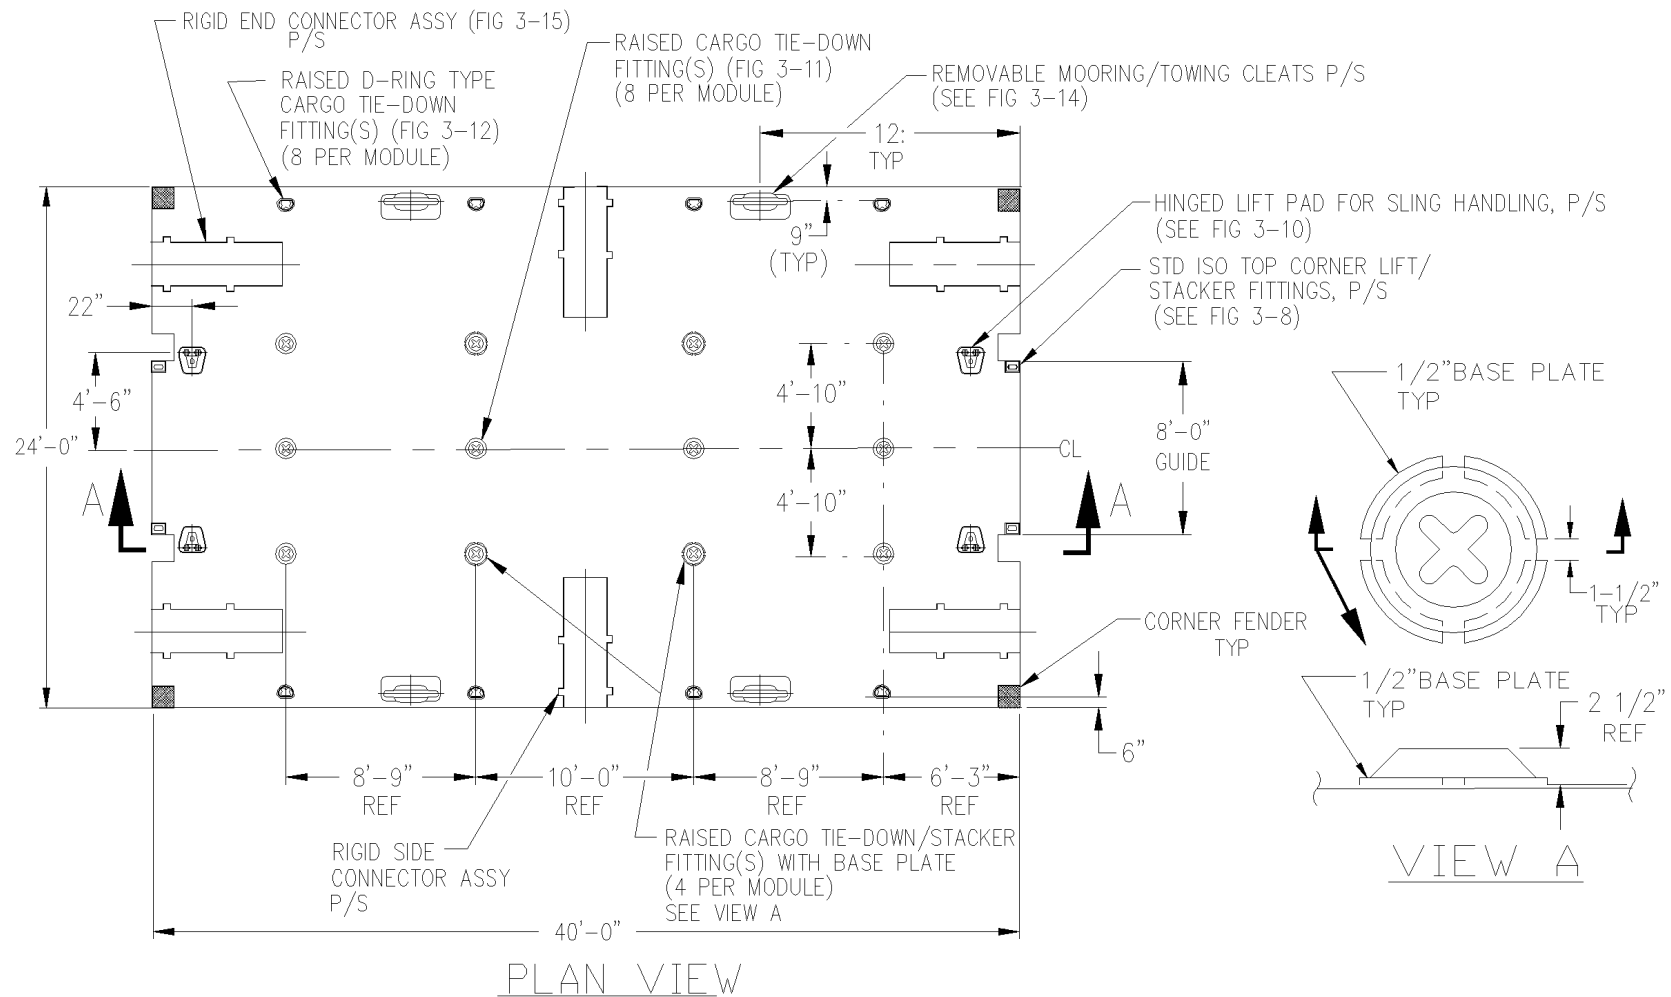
ACB Lighter Center Module Deck Fitting Arrangement and Details (Sheet 1 of 2)
